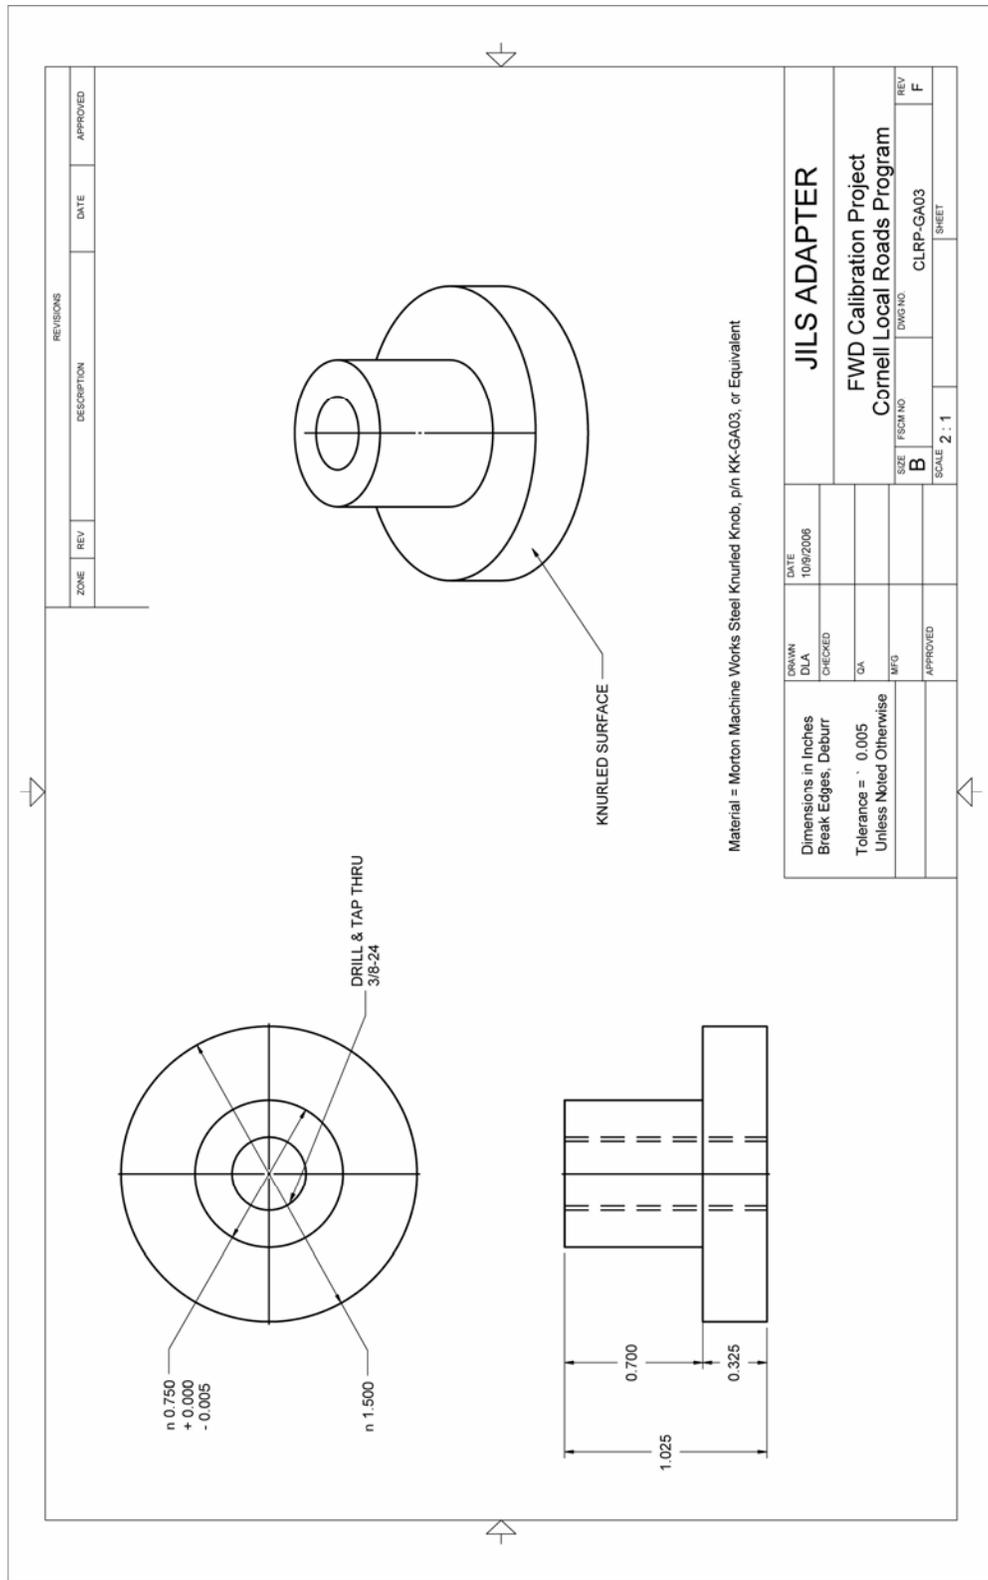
Drawing. CLRP-GA03 JILS Adapter.
